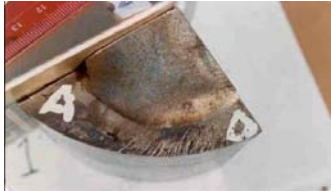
Section of the Shaft showing the cracks. Corrosion is seen on the key slot surface and on the corners
